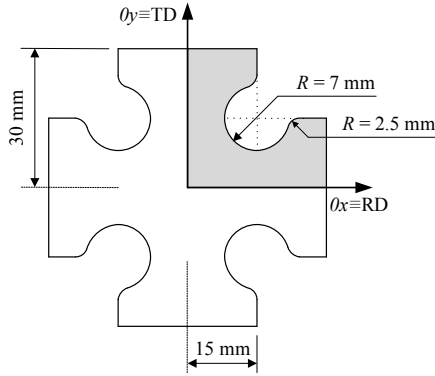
Geometry and in-plane dimensions of the biaxial tensile test on a cruciform sample [6]. The specimen thickness is 1 mm.
